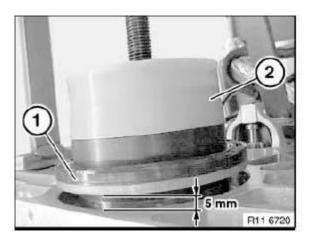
Identifying Radial Shaft Seal Position And Support Ring Courtesy of BMW OF NORTH AMERICA, INC.
